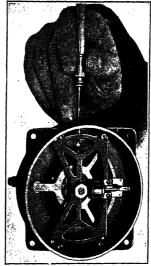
Showing how screw-DRIVER MAY BE INSERTED BY THE REMOVAL OF THE ACCESS
